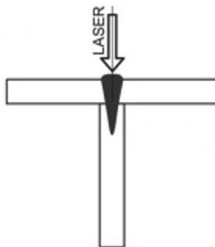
Scheme of laser welding of T-joints with slot weld.
